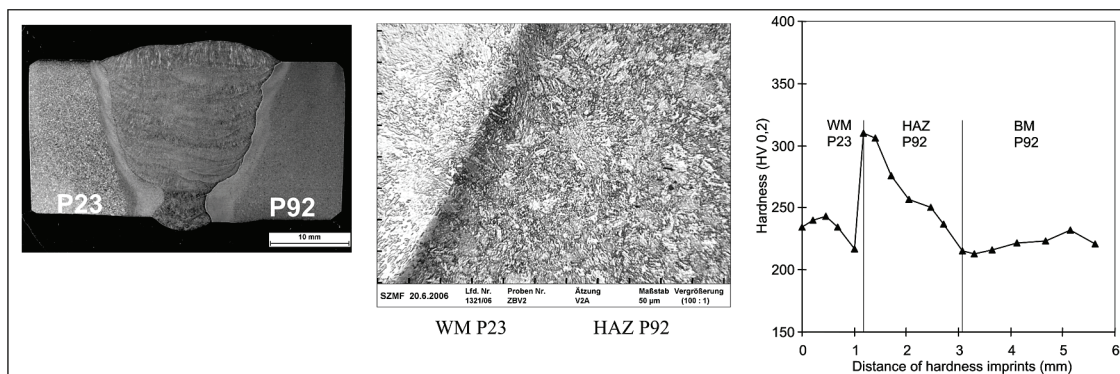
Microstructure in HAZ of T91 and Hardness across weldments of dissimilar joint P23 / P92; filler metal matching P23 (PWHT 740 °C / 2 h)
